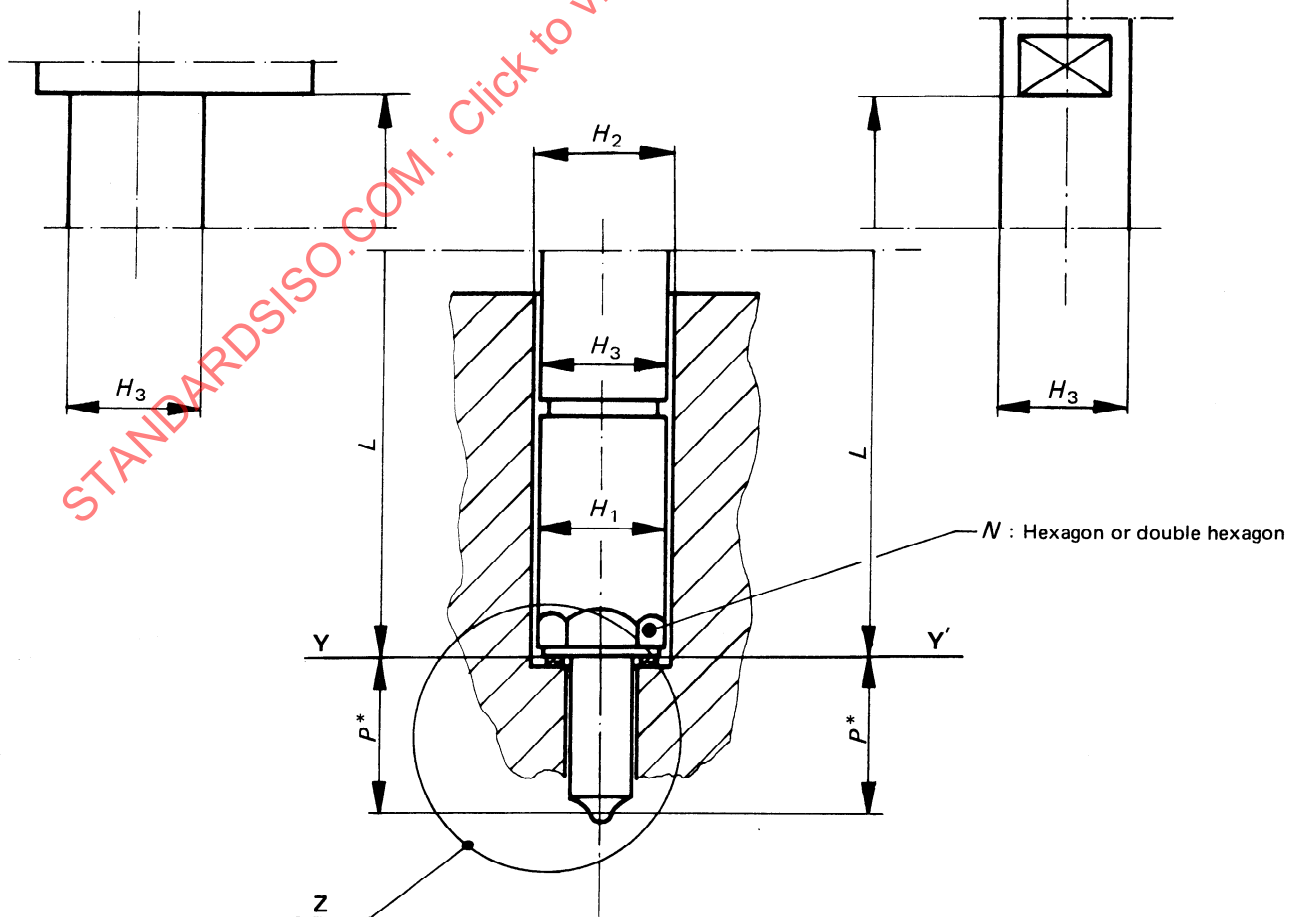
Injection nozzle holder with body, types 8 and 10
